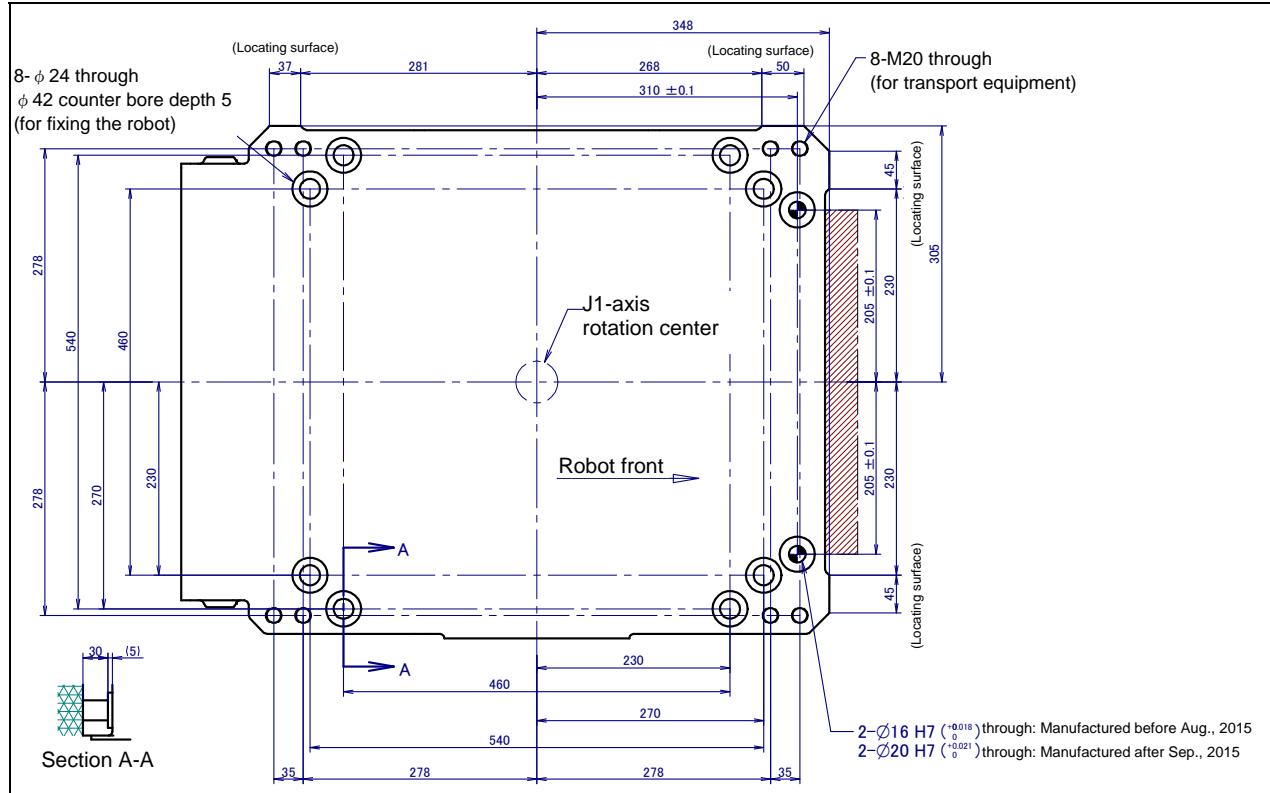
(a) Dimensions of the robot base (R-2000iC/165F/210F/125L/165R/210R)
